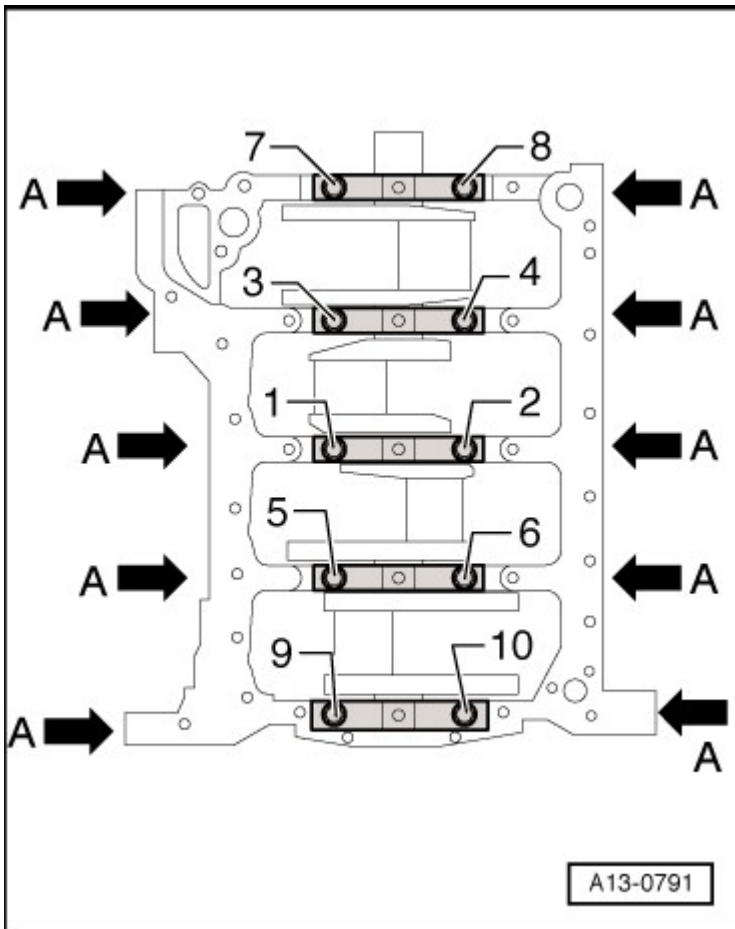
Identifying Crankshaft Bearing Cap, Installation
